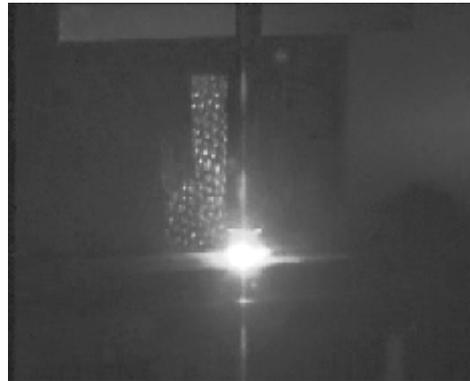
Simulated view of the welder recorded with a CCD camera and standard protective glasses
